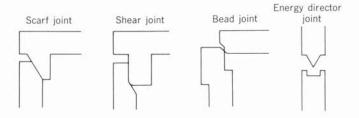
Various Joints for Ultrasonic Welding
